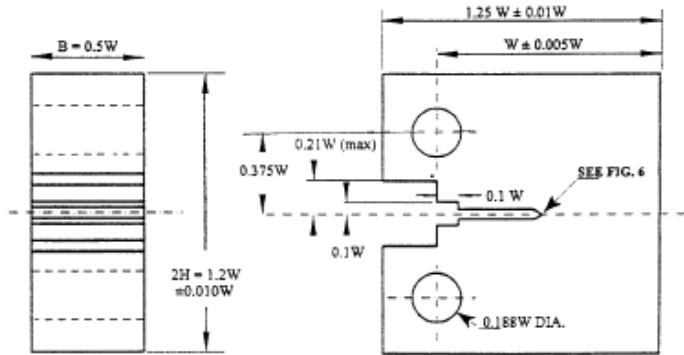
Sketch of drawing specifications for Compact Specimens for J_{IC} fracture toughness test, adapted from Ref. [30].
